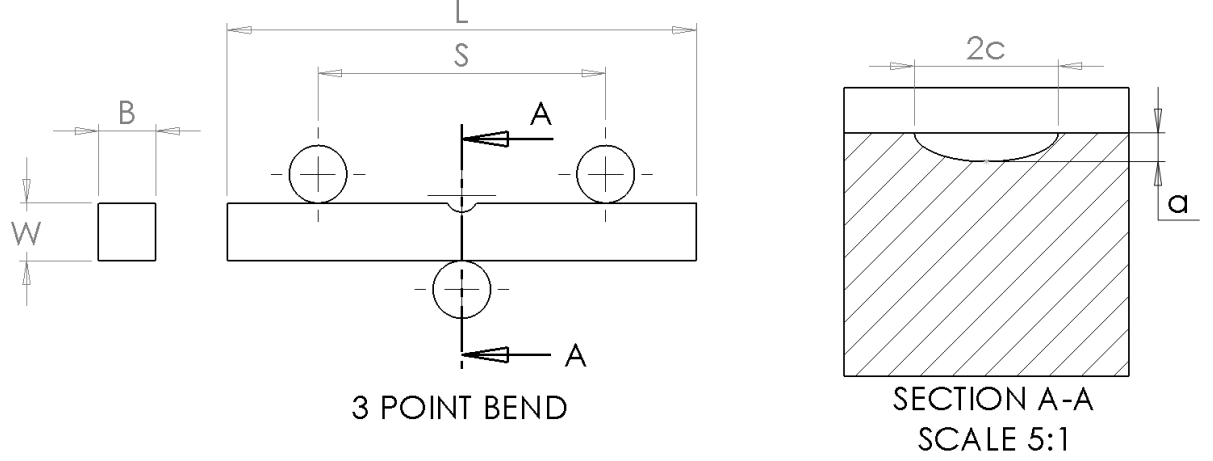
Drawing of U-notch sample with dimensions labelled. Cross section of U-notched sample through notch centre containing semi-elliptical crack with dimensions labelled.
